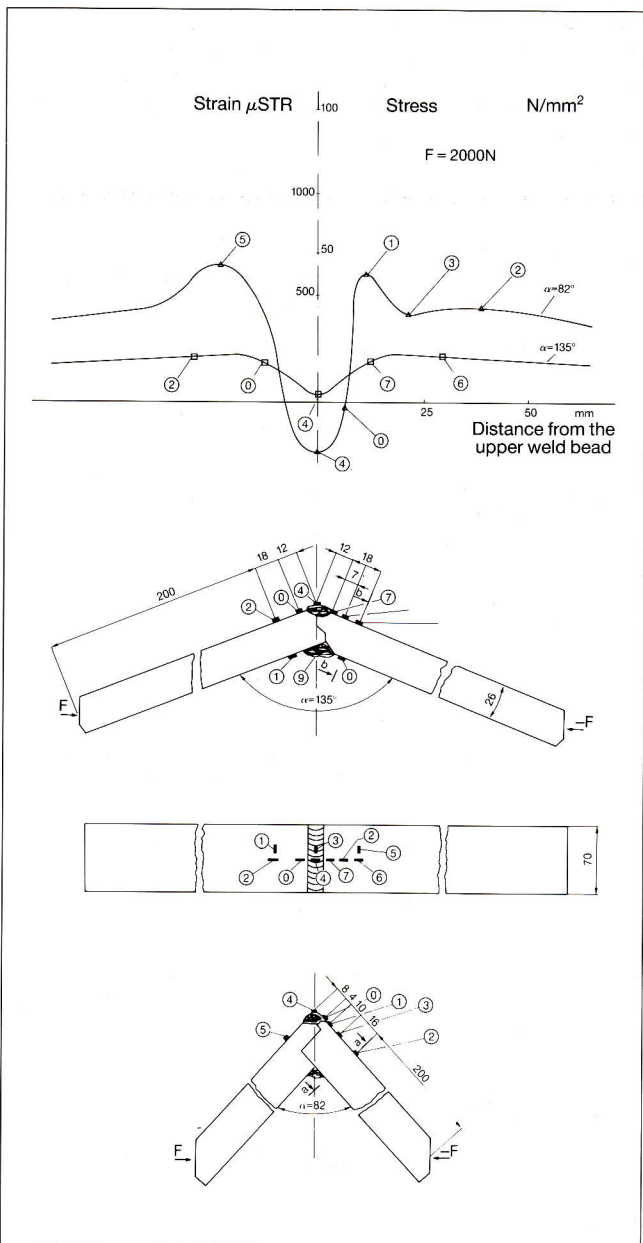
Appearance of a welded joint subjected to loading for stress corrosion test.
